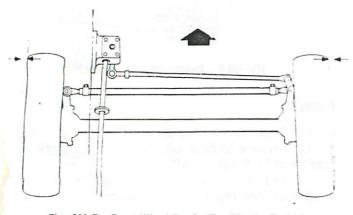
M-7 Front Wheel Toe-In (Top View)—Typical
